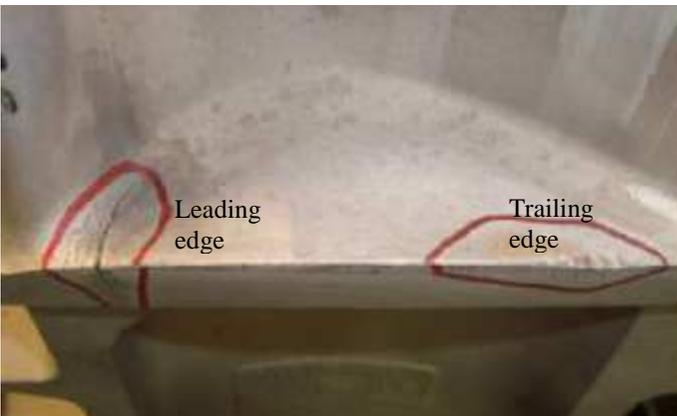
Pressure side LE and TE platform cracking found during penetrant inspection
